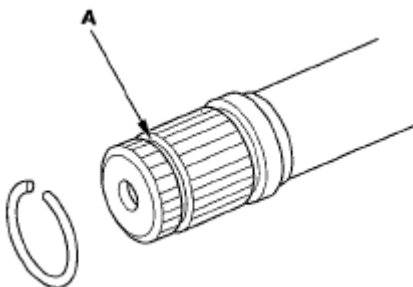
Identifying Stop Ring In Driveshaft Groove
